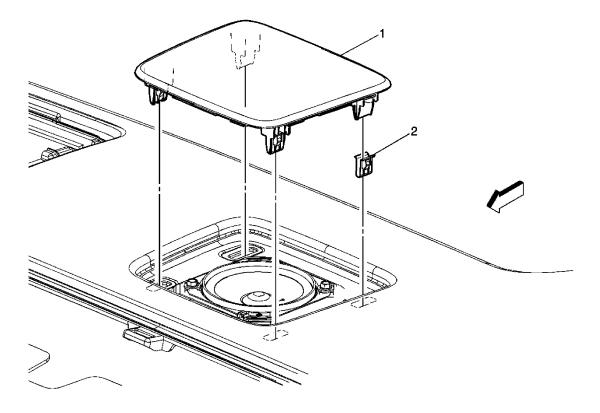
Radio Front Speaker Grille Replacement Courtesy of GENERAL MOTORS CORP.
